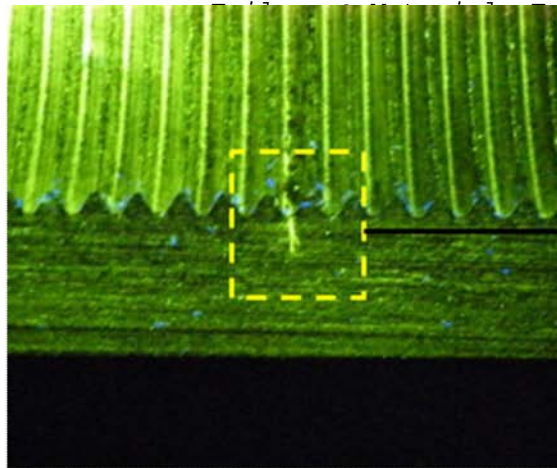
MT Highlighting Crack on Coupling 11-P7C-7
